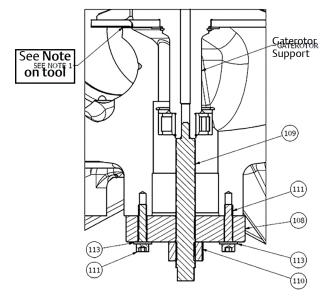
Tool To Install and Remove Bearing Housing Assembly
